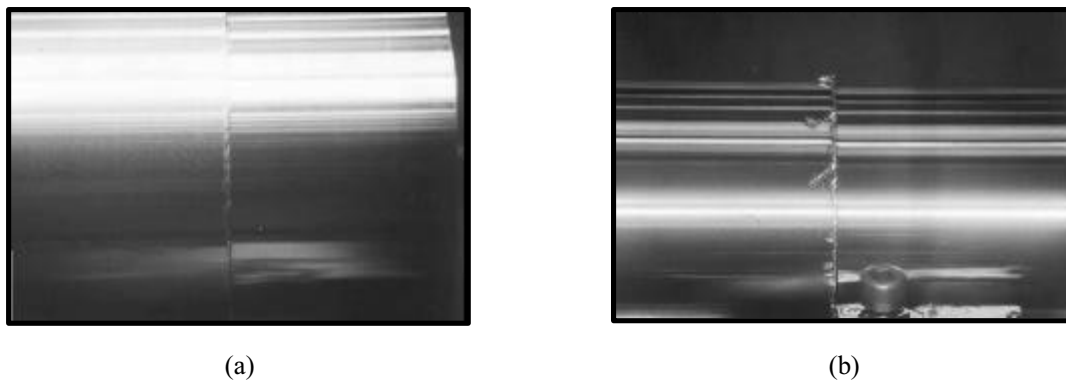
Photographs of a bar taken at different stages of the tool wear test in which burrs can be observed. (a) Burrs formed about half way through the test and (b) Burrs formed at the end of the test.
